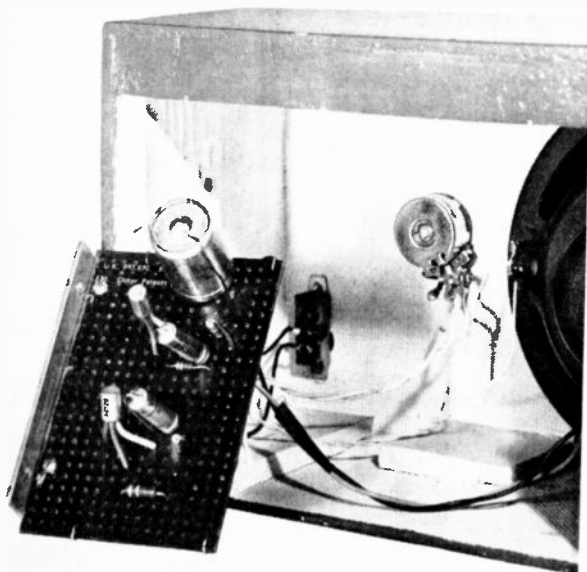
Layout and wiring of the components mounted on the Veroboard
